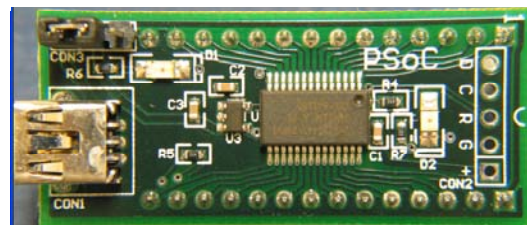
illustrates the top side of the Invention Board PCB. The following is a list of the main components that reside on the top side of the PCB:
